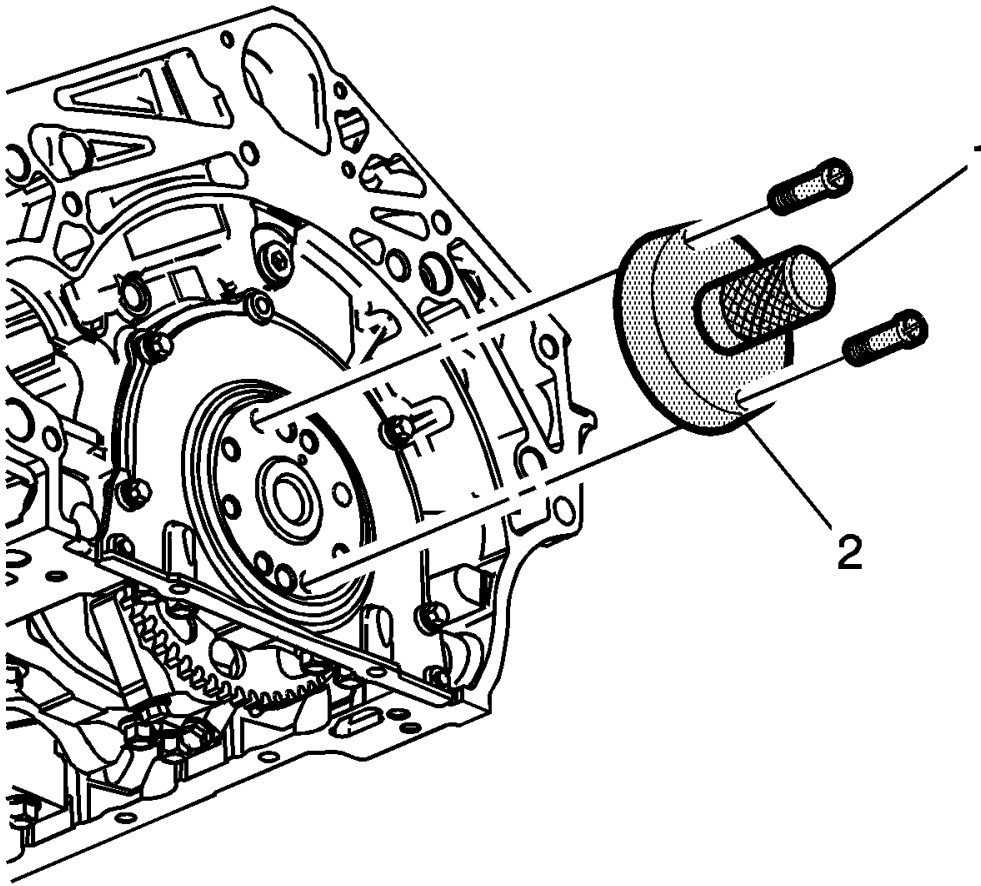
Crankshaft Rear Oil Seal Installation Tool & Handle
